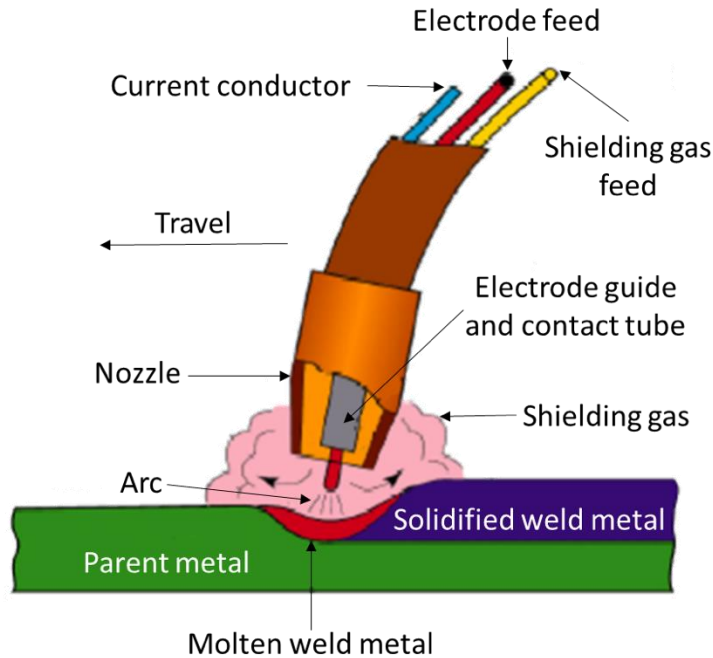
Schematic of MAG welding. Adapted from [27].
